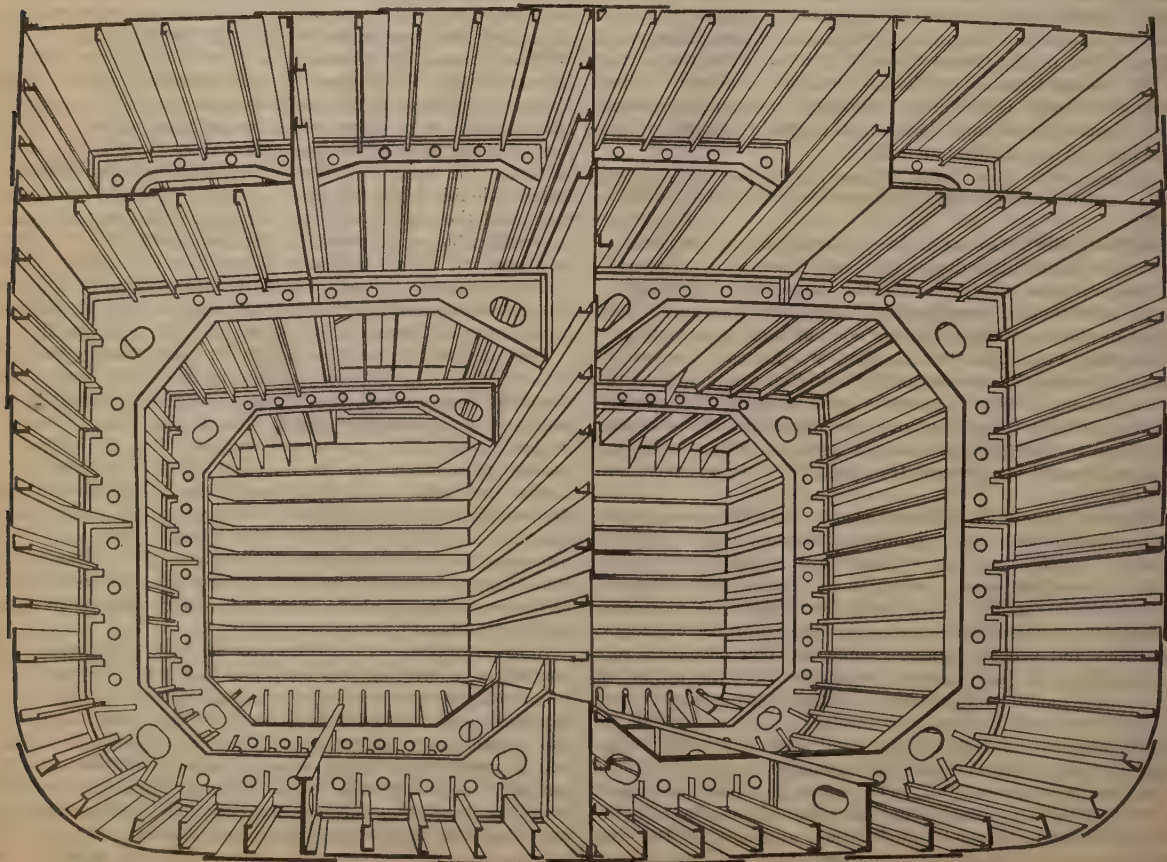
Internal view of an oil tank steamer built on the Isherwood principle.
